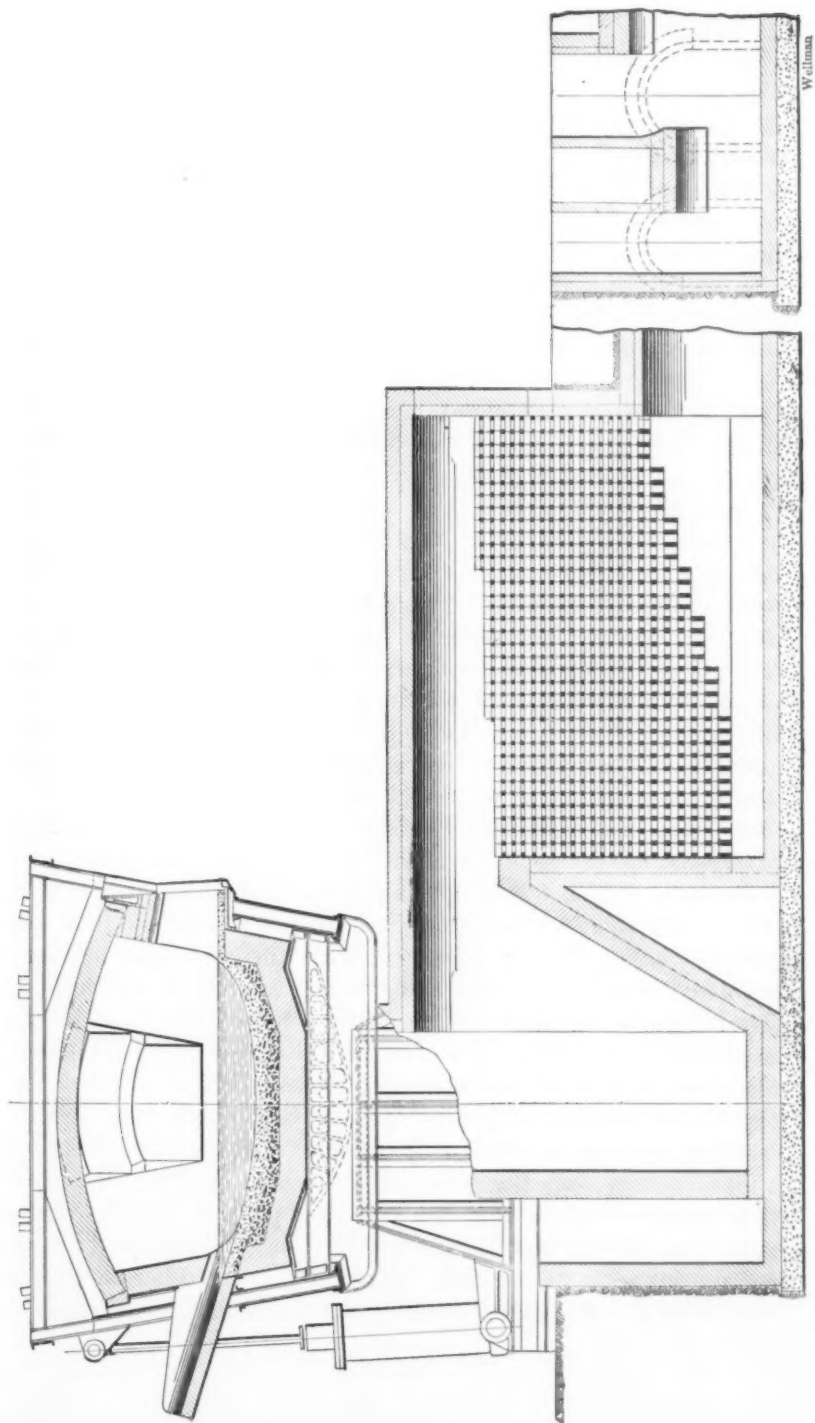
TWO-HUNDRED-TON FURNACE. LONGITUDINAL SECTION.
